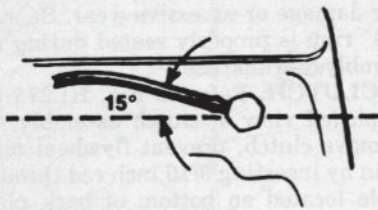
Oil line and fitting in oil tank must be angled 15° as shown above.
